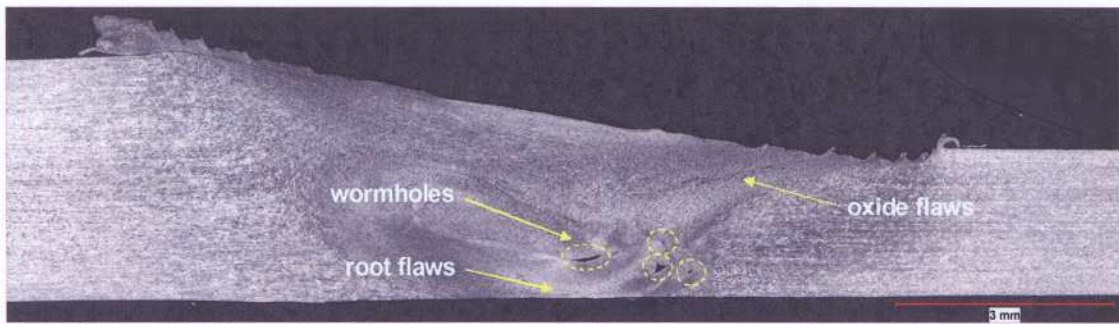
Metallography of a TWB specimen. Welding parameters: cylindrical threaded pin, welding speed of 1200 mm/min, spindle speed of 1500 RPM, shoulder penetration of 0 mm
